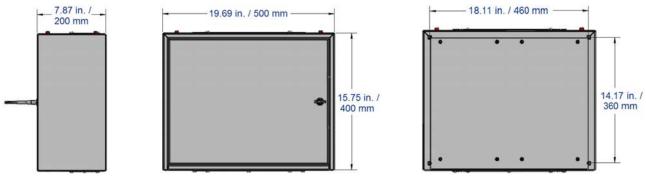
SINGLE SK Enclosure Overall and Mounting Dimensions
